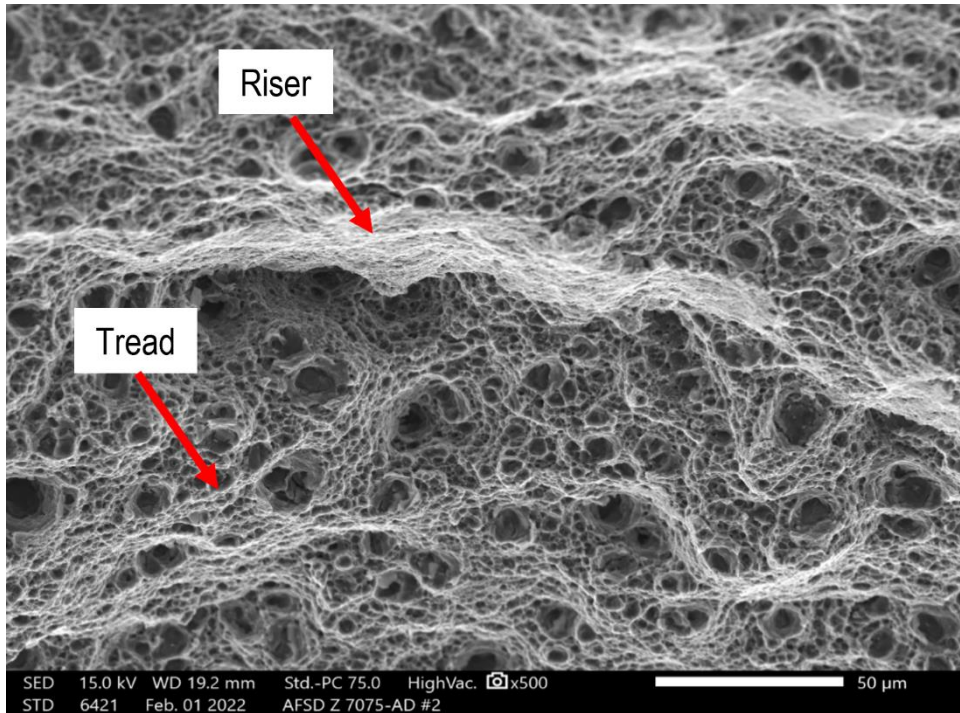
The fracture surface of the as-deposited 7075 material taken at 1000X, showing the flat tread and the sheared riser of the fracture surface.
